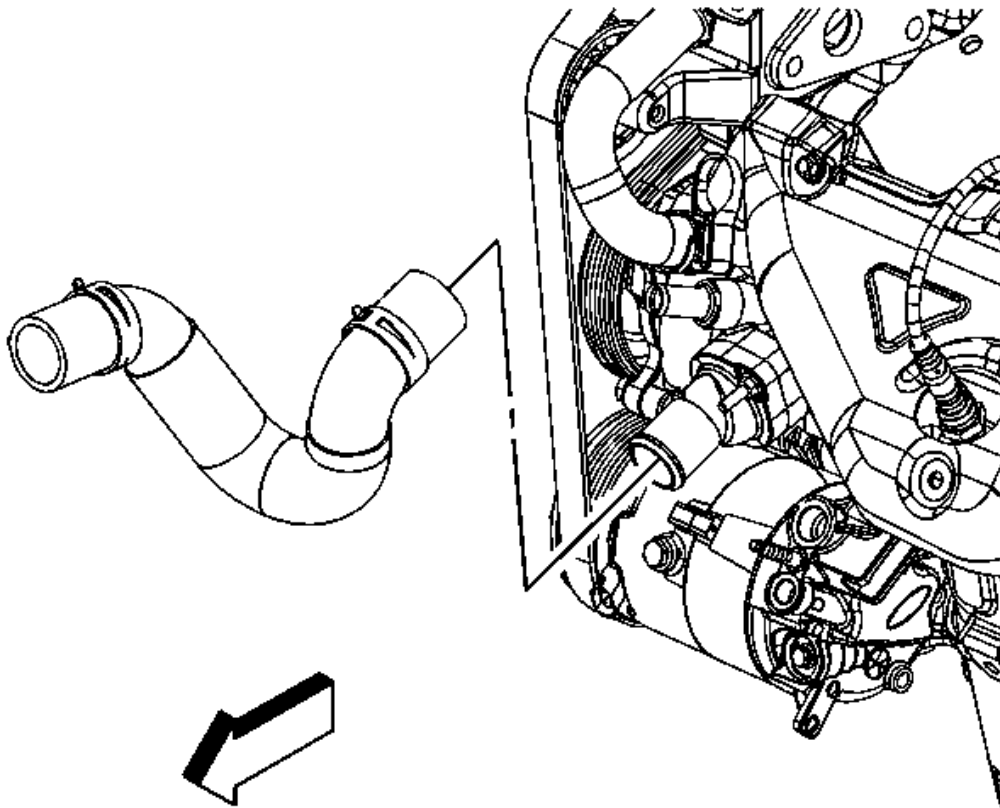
Radiator Outlet Hose & Thermostat Housing
